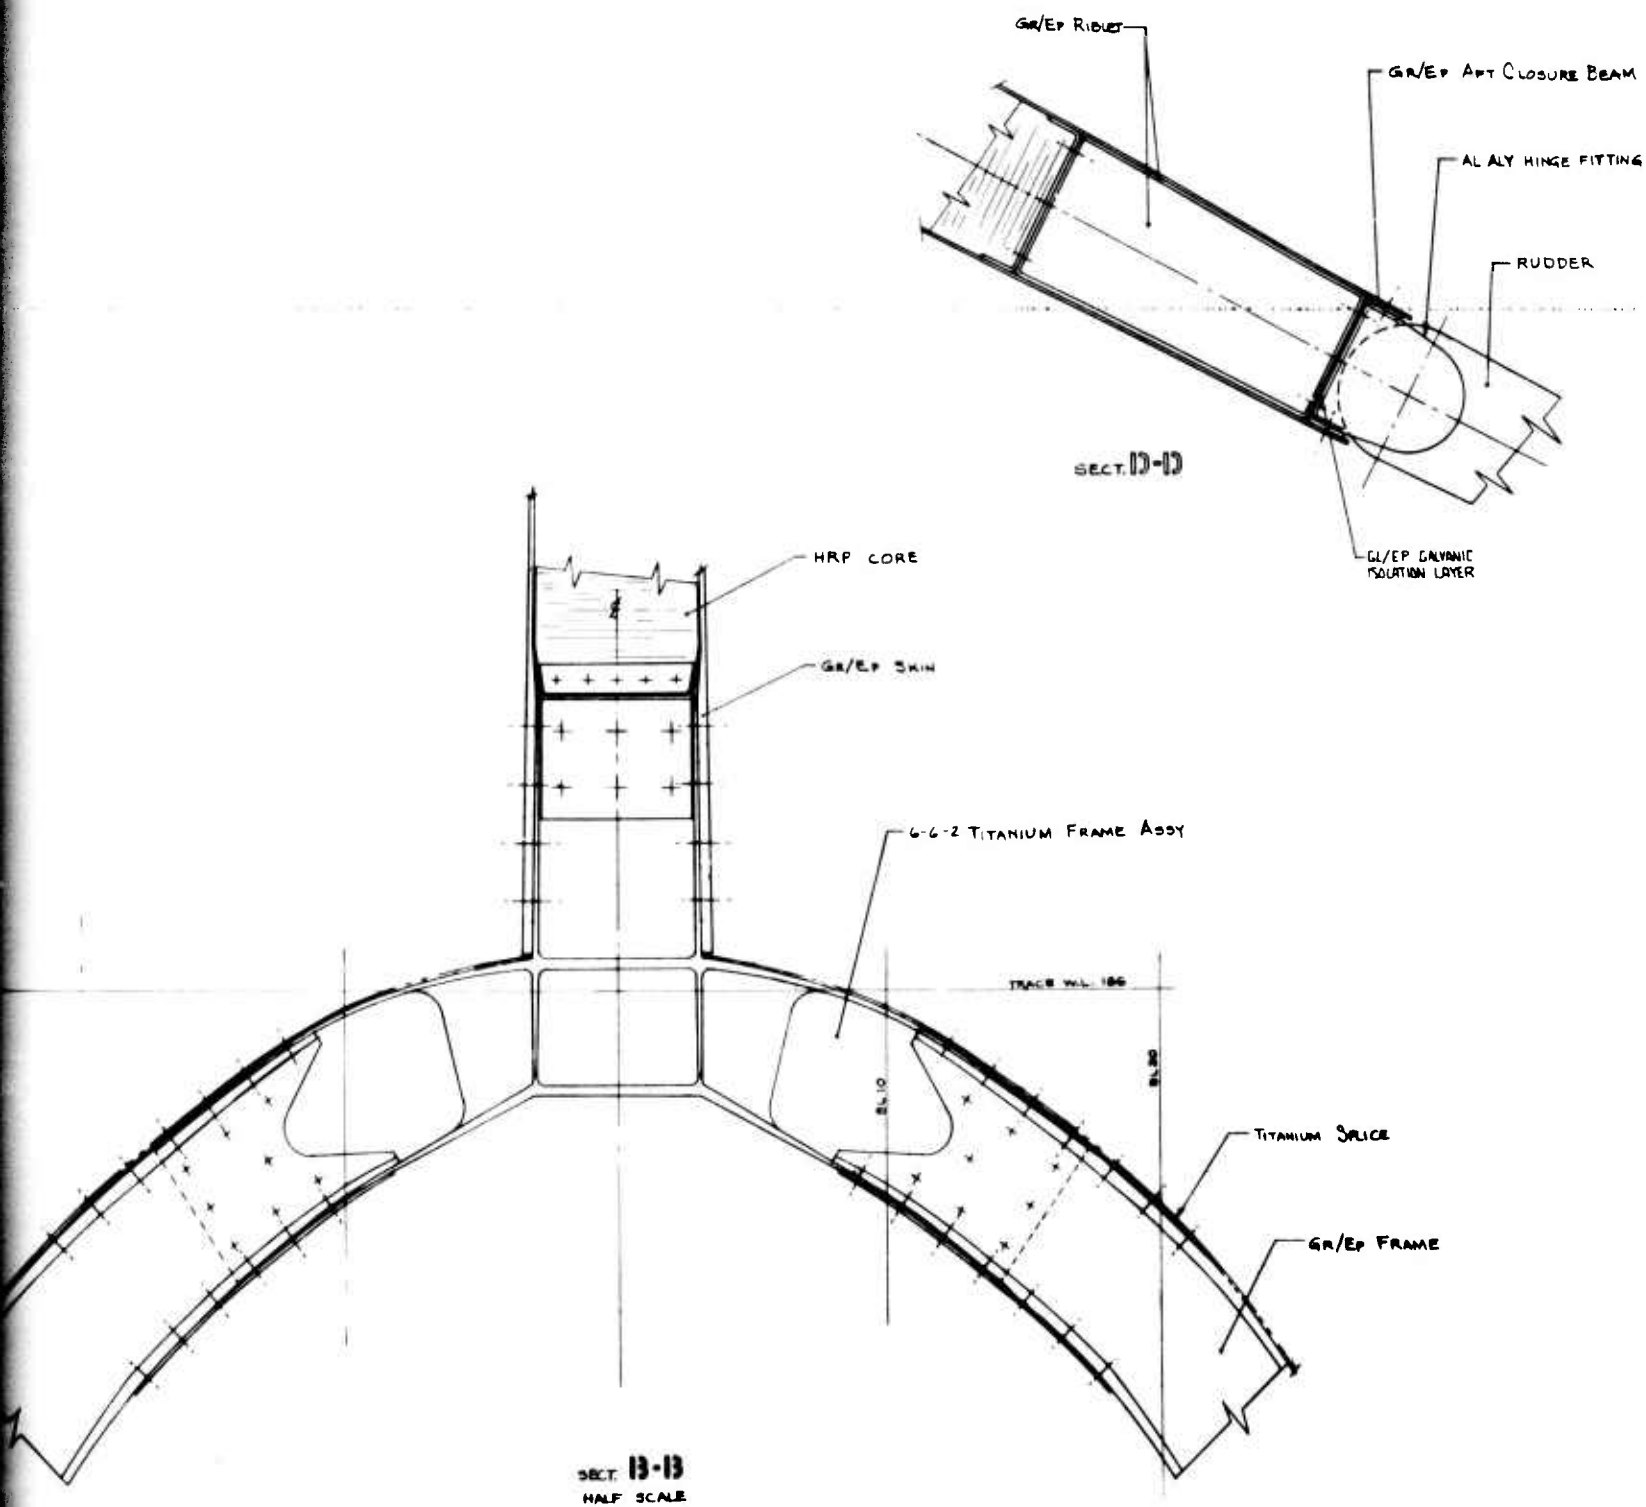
ADCA Fin Assembly and Installation (Sheet 2 of 2)
